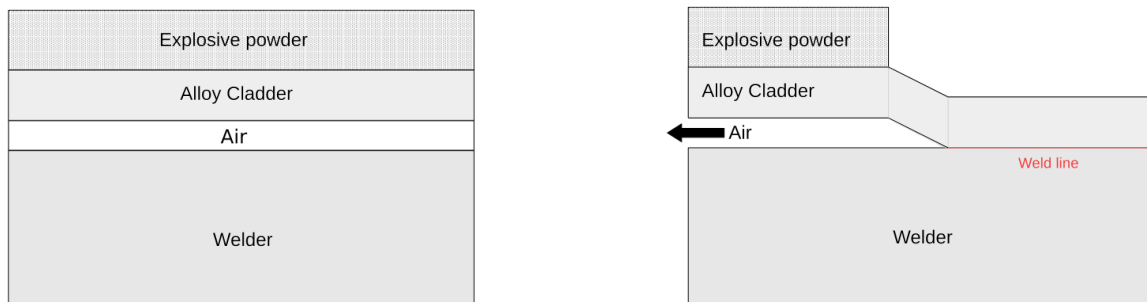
Schematic view of the plates before (left) and during (right) the explosion welding.
